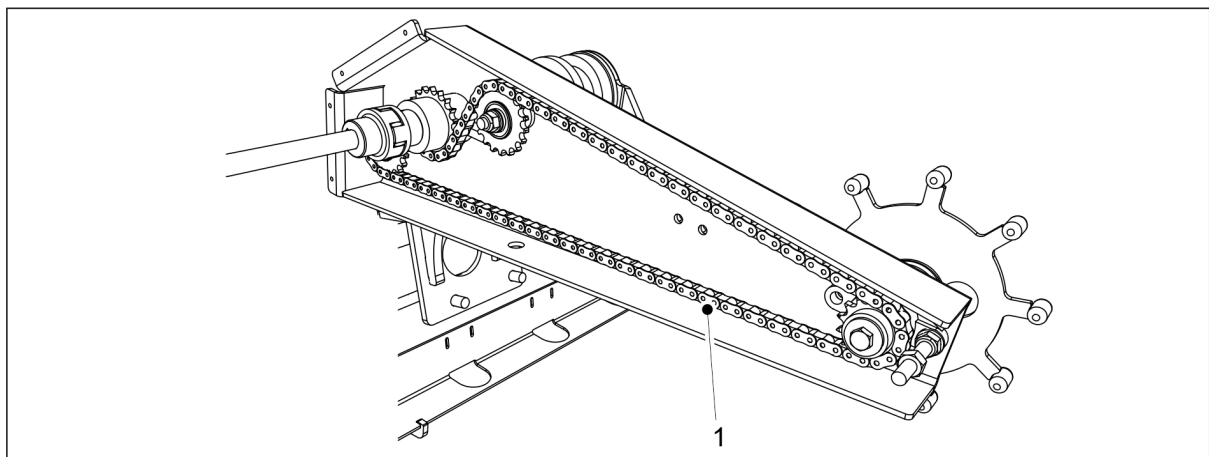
240. Lubricating the wheel drive chain
